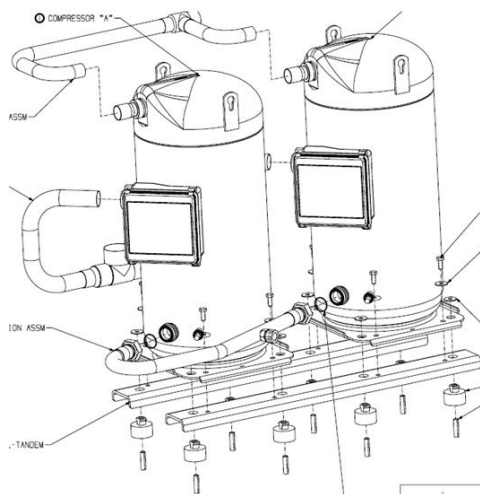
Tandem assembly for ZP385K* & ZP485K
